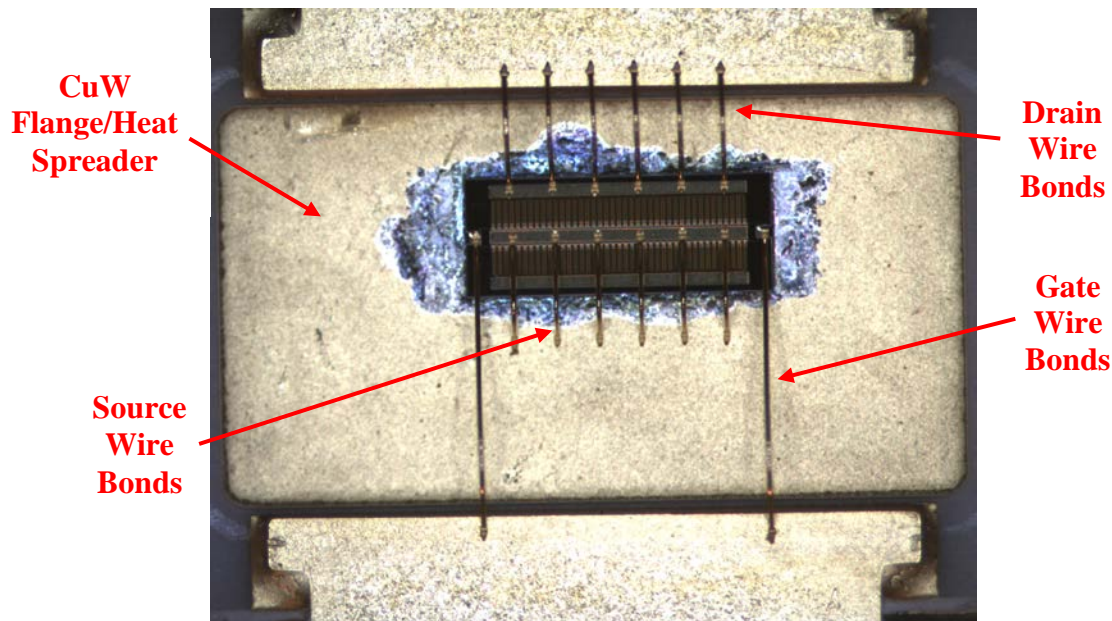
Completed Assembly of the Multiple Field Plate HEMT Device Showing Die Attachment to the CuW Heat Spreader and the Wire Bonding Configuration. (MTS)
